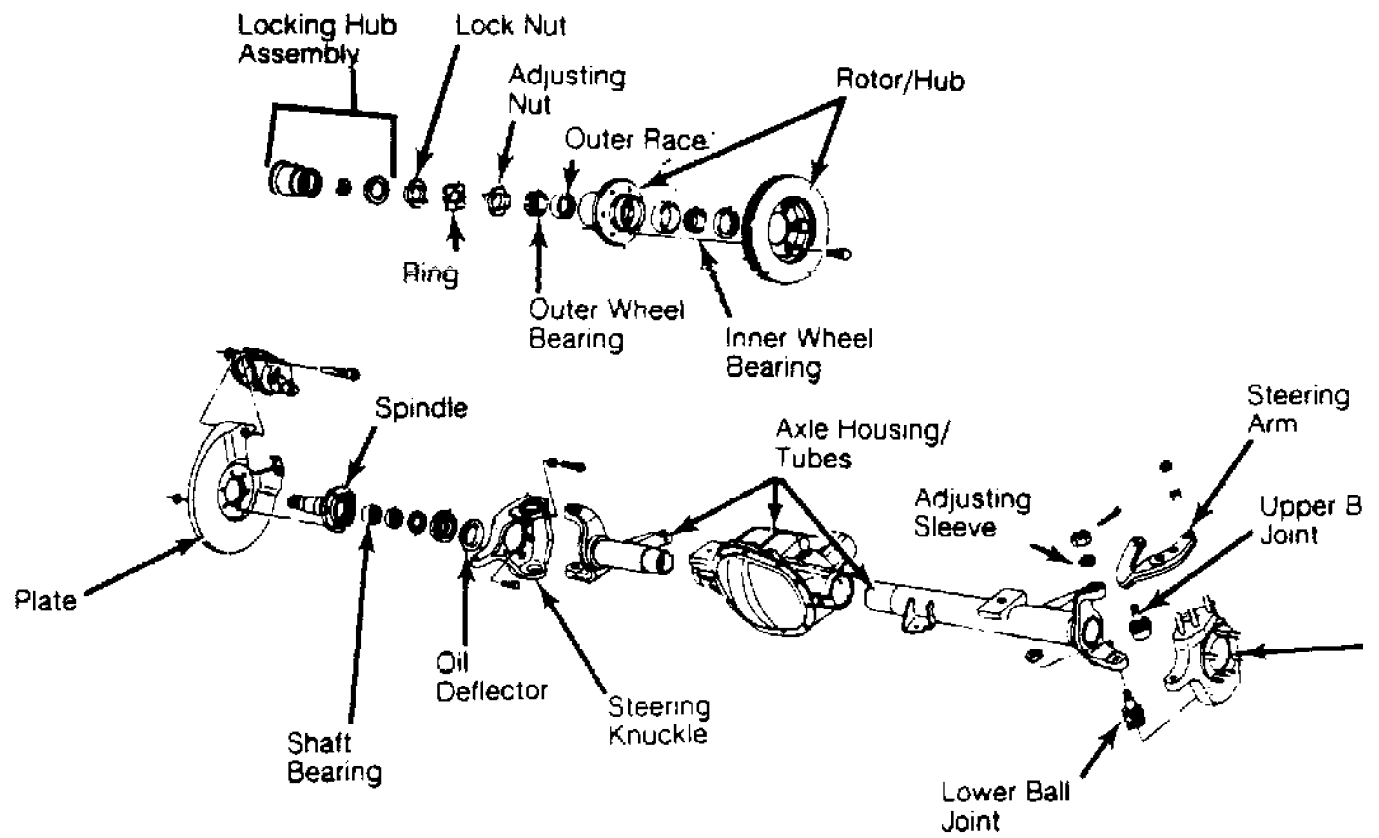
Exploded View of Ball Joint Type Steering Knuckle Assembly
